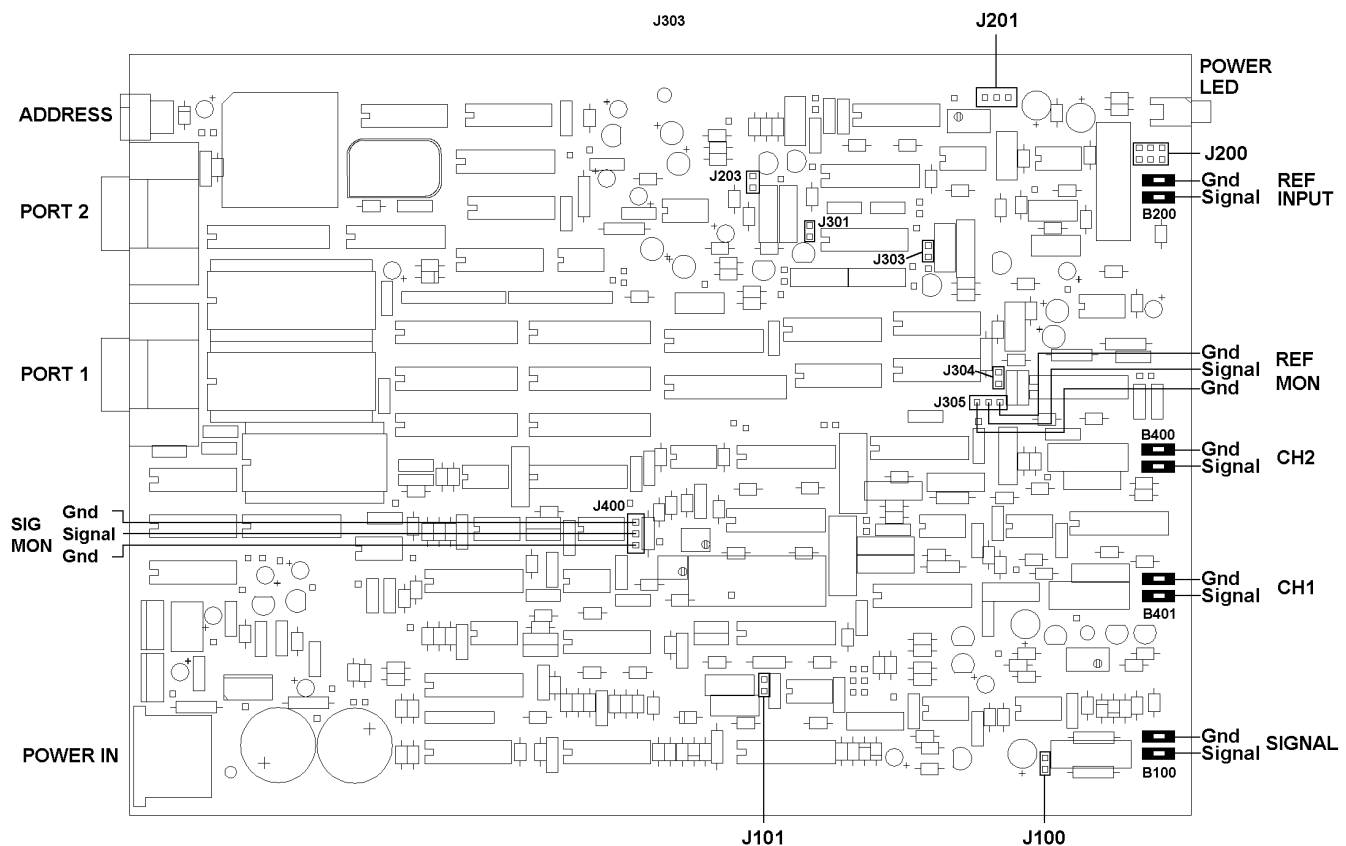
, Model 5105/5106 PCB Assembly - Component Side
